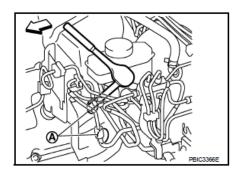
Illustrating Removing Expansion Bar Courtesy of NISSAN MOTOR CO., U.S.A.
